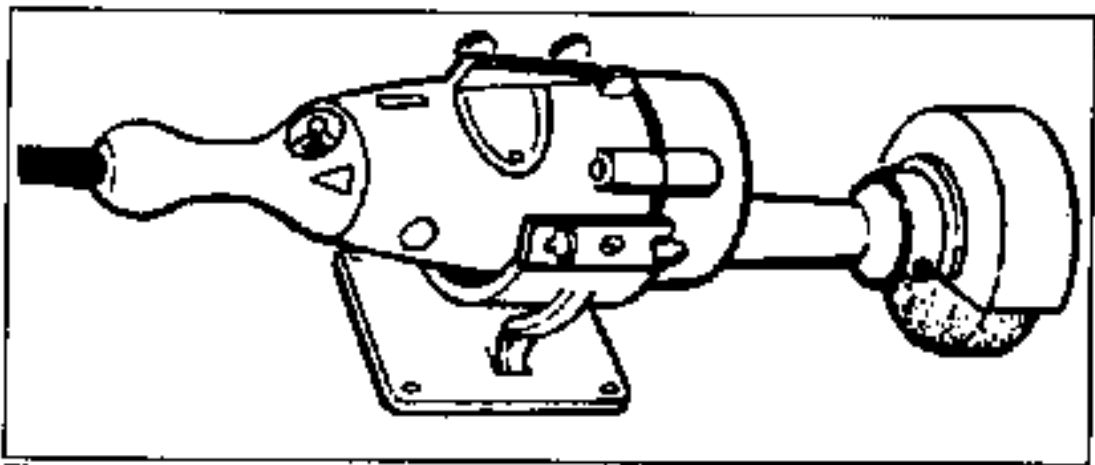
Portable electric grinder (wheel type) with grinder stand.
